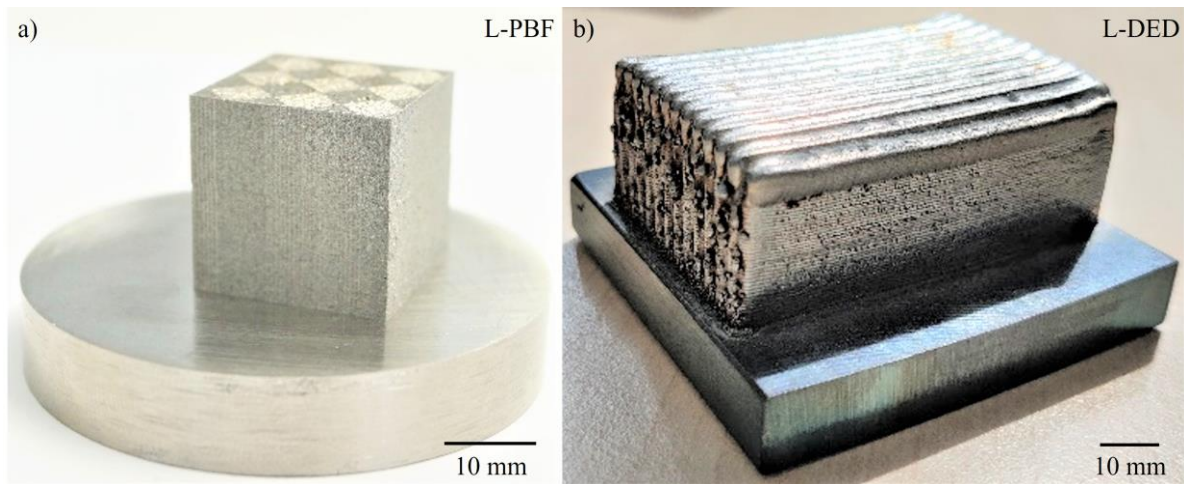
Exemplary large specimens used for the generation of test specimens for compression tests. a) L-PBF. b) L-DED.
